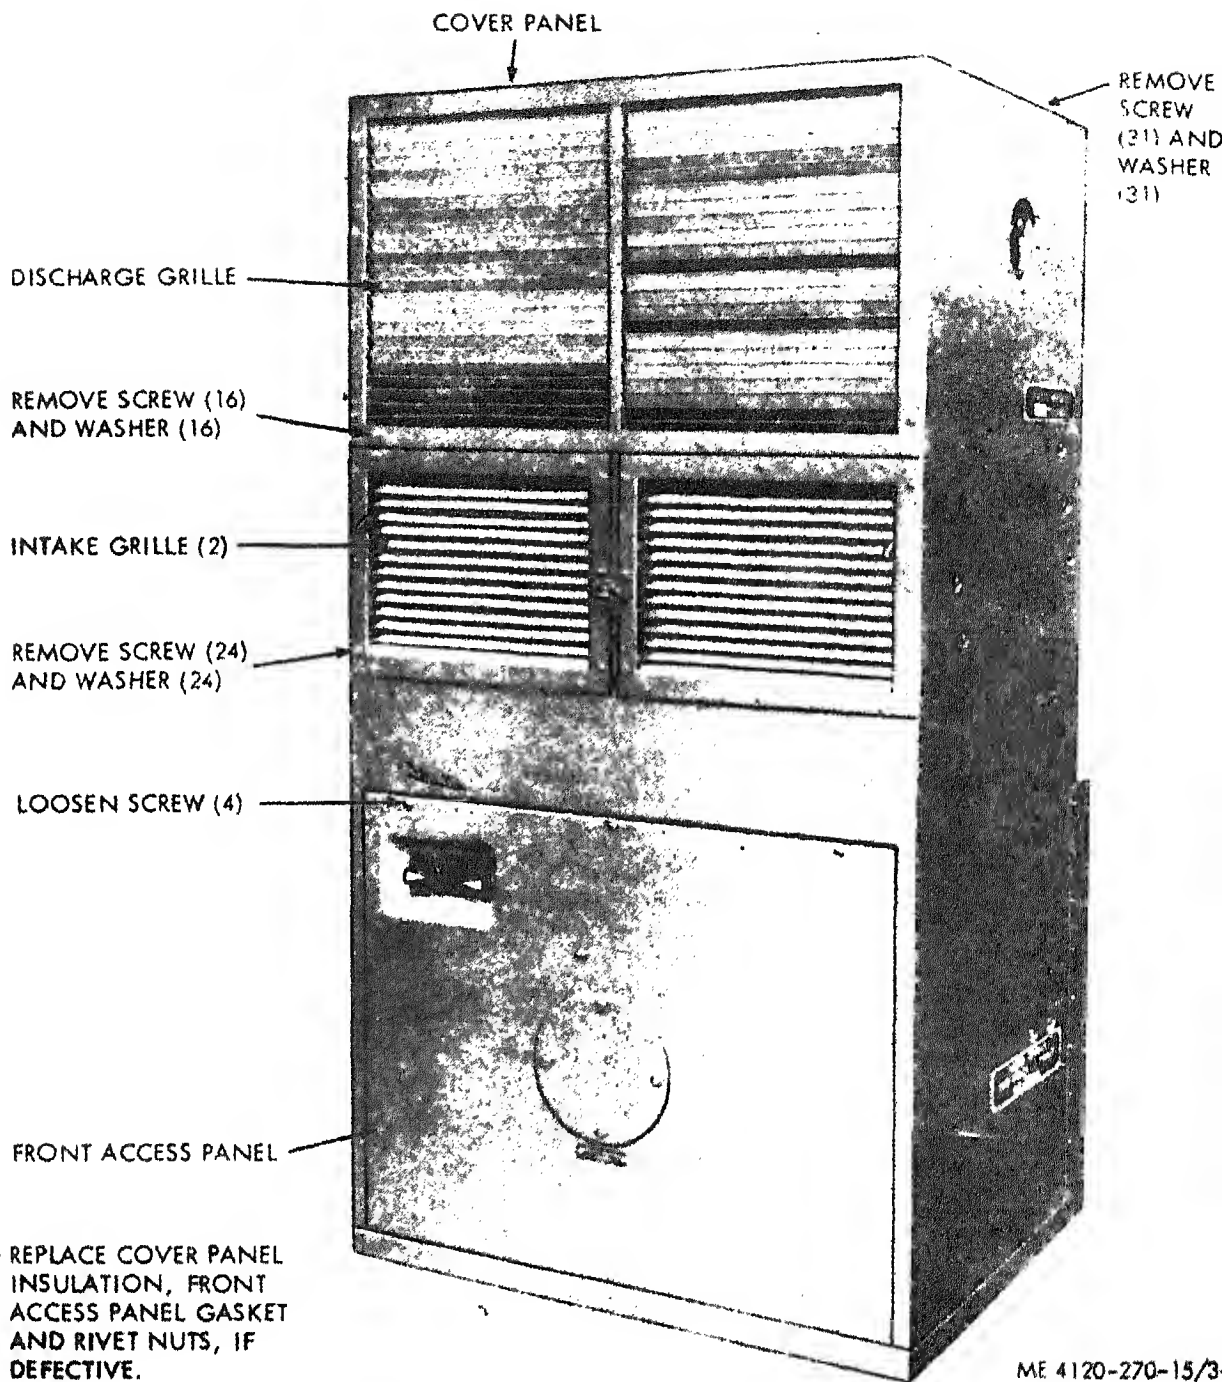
Cover panel, discharge grille, intake grille and front access panel, removal and installation.
